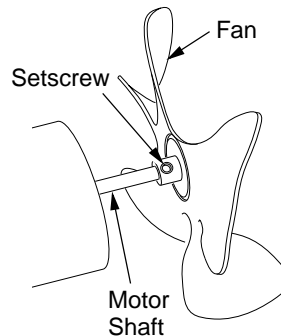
Fan, Motor Shaft, and Setscrew Location
